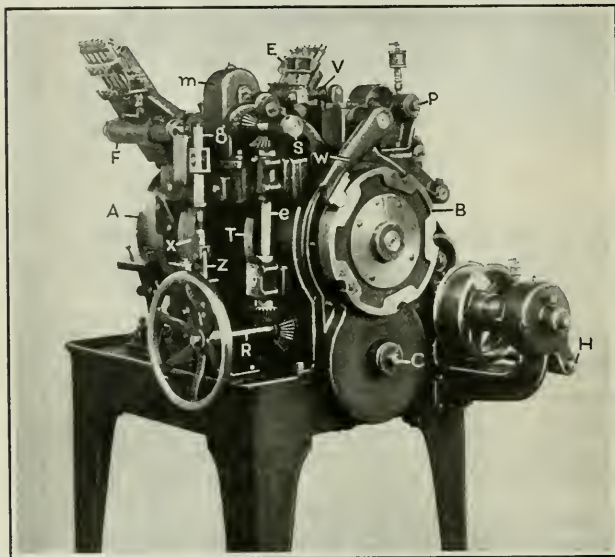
View from the Rear showing Indexing Cam and Tapping Head Drive
